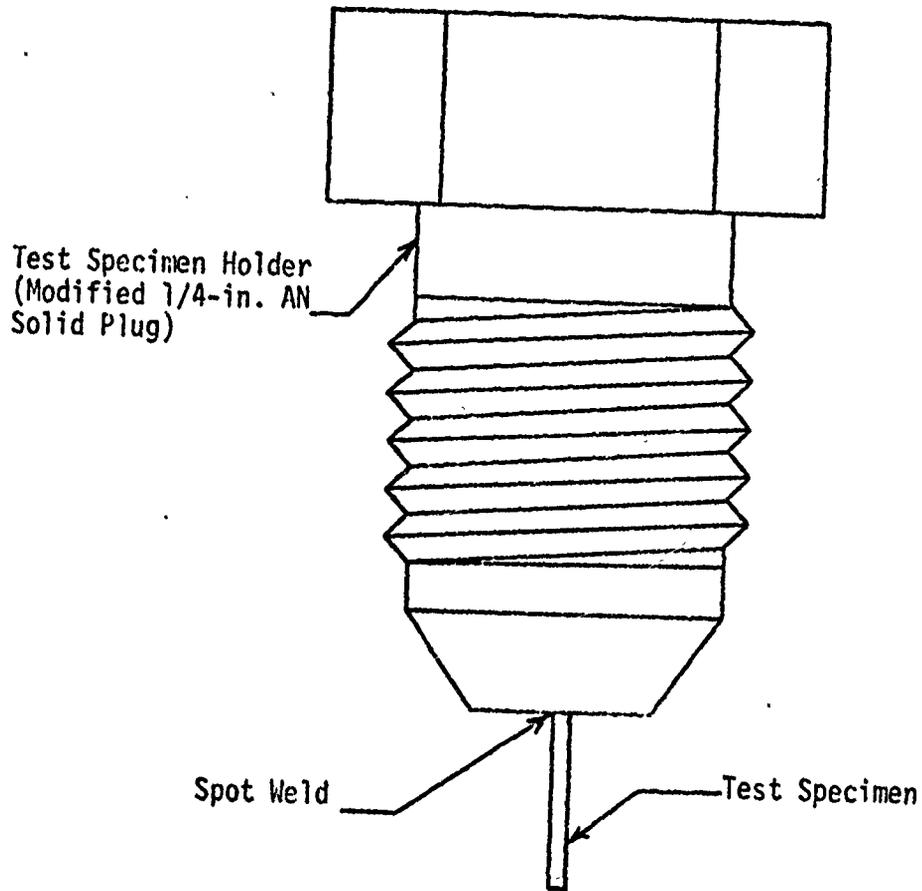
Schematic of Test Specimen Holder with Test Specimen in Place.
